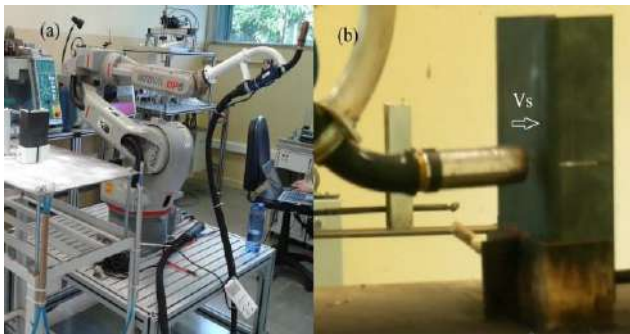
Torch displacement system: (a) robotic arm adaptation; (b) joint positioning and welding direction.
